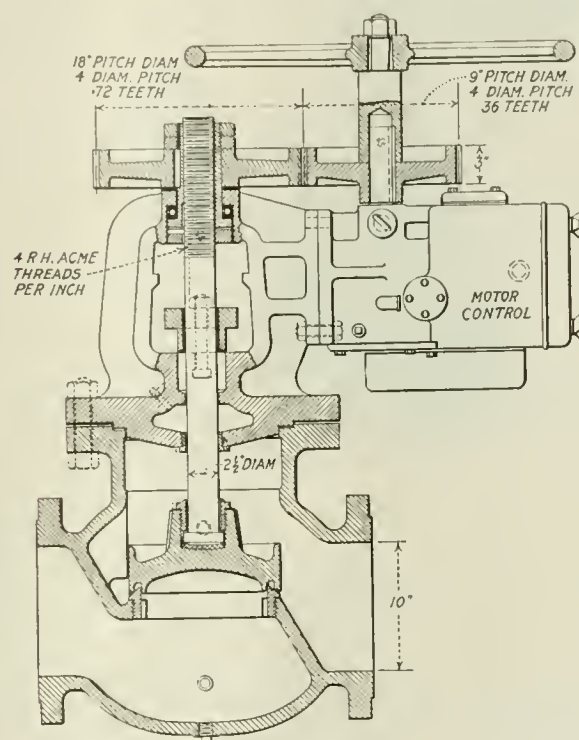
CROSS-SECTION OF AN ELECTRICALLY OPERATED GLOBE VALVE PROVIDED WITH BALL THRUST BEARINGS
